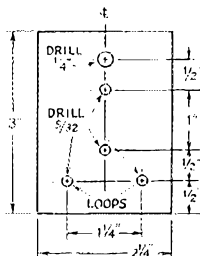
The insulating mounting for the driven element is made from a piece of 3/8-inch Plexiglas, cut and drilled as indicated.
